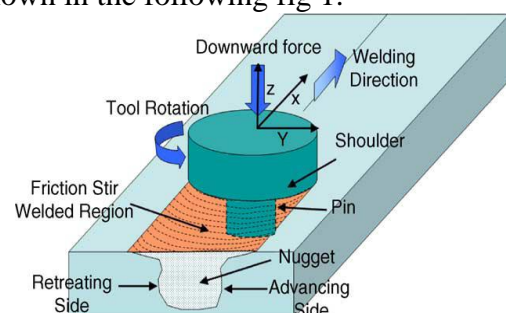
Schematic illustration of principle of friction stir welding^[10]
